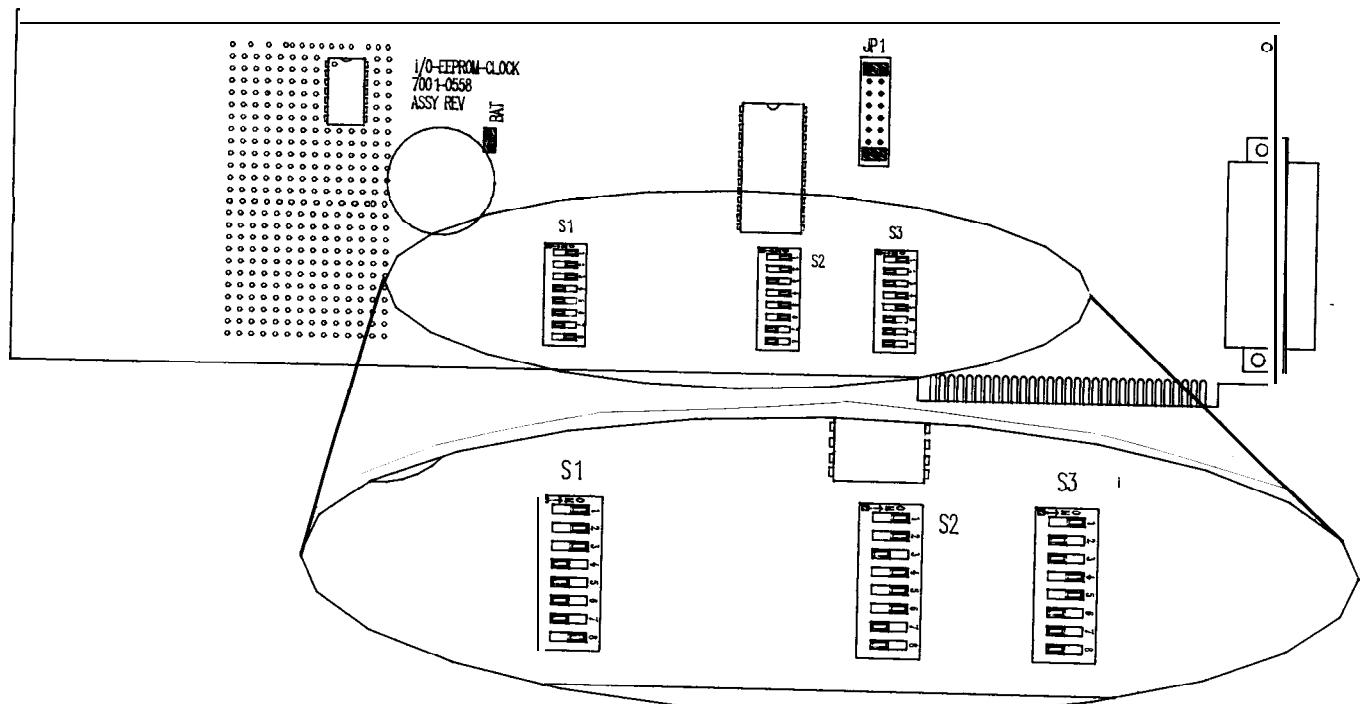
I/O/EEPROM/CLOCK Board, 7001-0558 or 7001-2016
